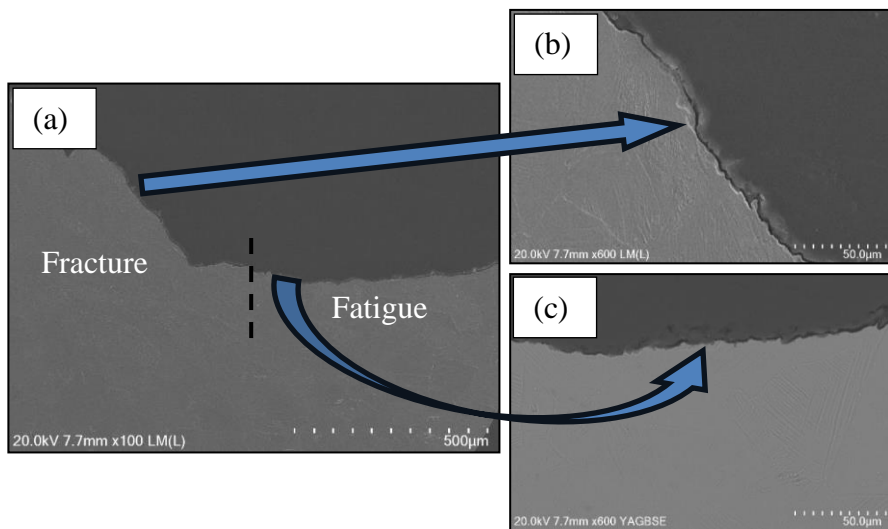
SEM image shows (a) the complete crack path, (b) crack path in fracture and (c) back scattered electron image of crack path in fatigue of specimen FT-6.
